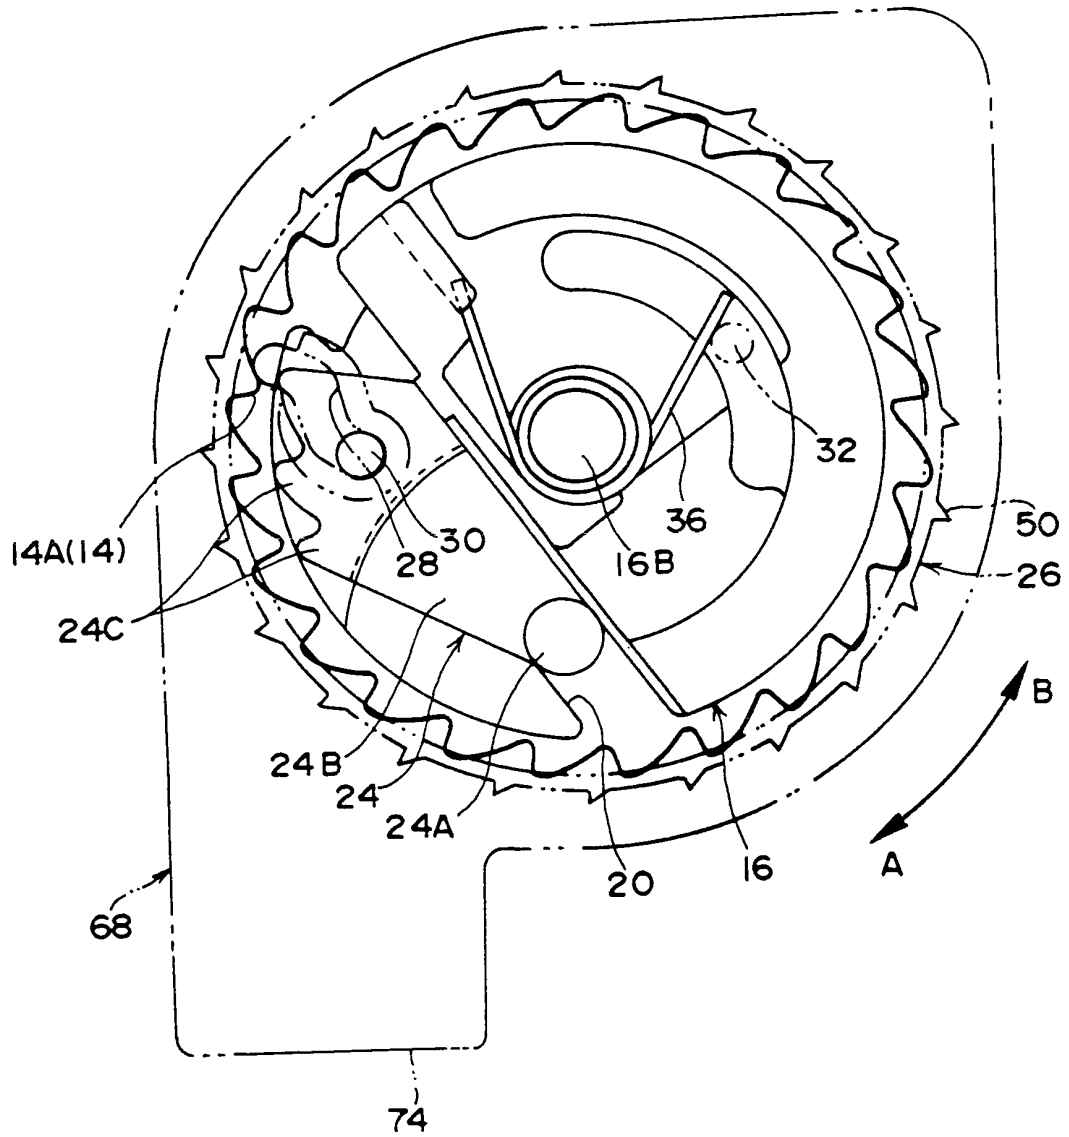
is a schematic diagram of a circular saw blade assembly in a cross-sectional view. The assembly includes a circular saw blade (14) with a serrated outer edge (16). The blade is mounted on a central hub (16B) which is secured by a bolt (36) and a nut (32). A drive shaft (20) is connected to the hub. A guard (24) is positioned around the blade, with a spring (28) and a pin (30) mechanism for retraction. A handle (68) is attached to the guard assembly (74). Arrows A and B indicate the direction of rotation.
